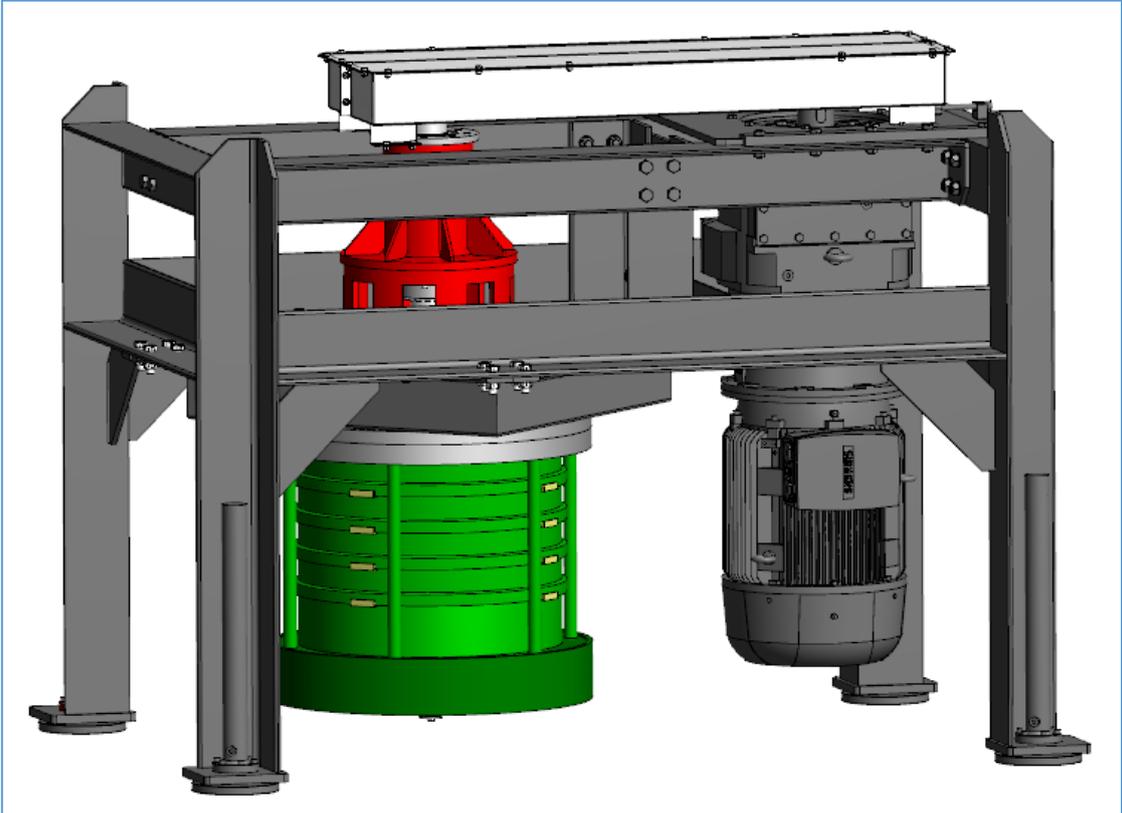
3D-construction plan of the RoStar mill fixed in a metal frame with driving System.
